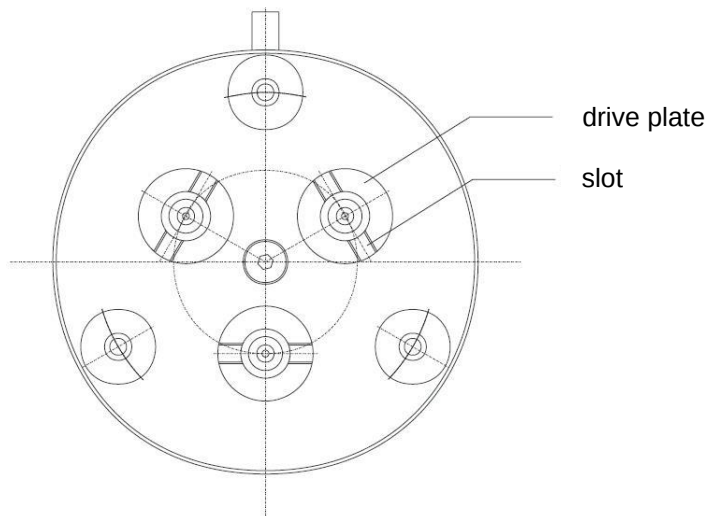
Radial rolling head E with tensioned spring mechanism (top view without front plate)
